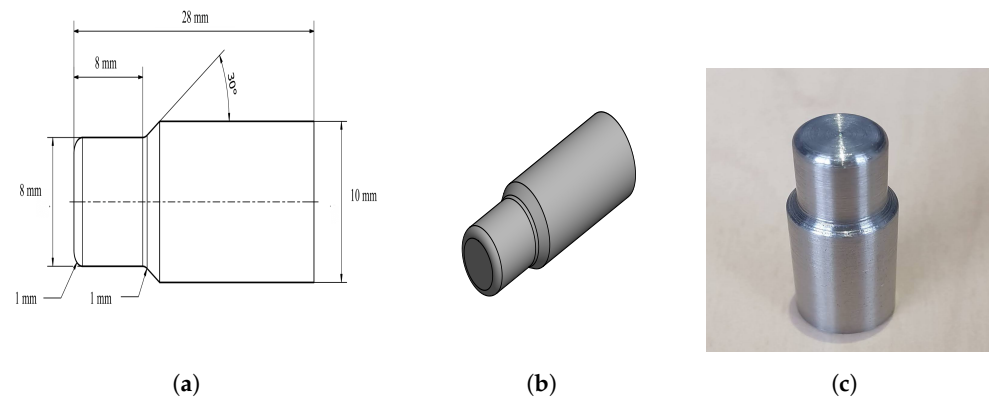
(a) Technical drawing of the terminal tip (set); (b) Terminal set of the force gauge designed in Autodesk Inventor; (c) Realized terminal set of the force gauge.
